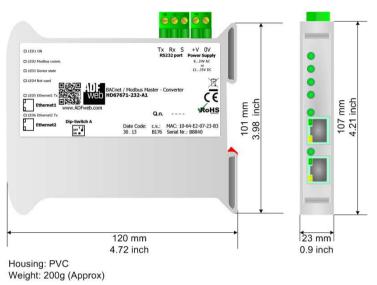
Mechanical dimensions scheme for HD67671-IP-2-A1
